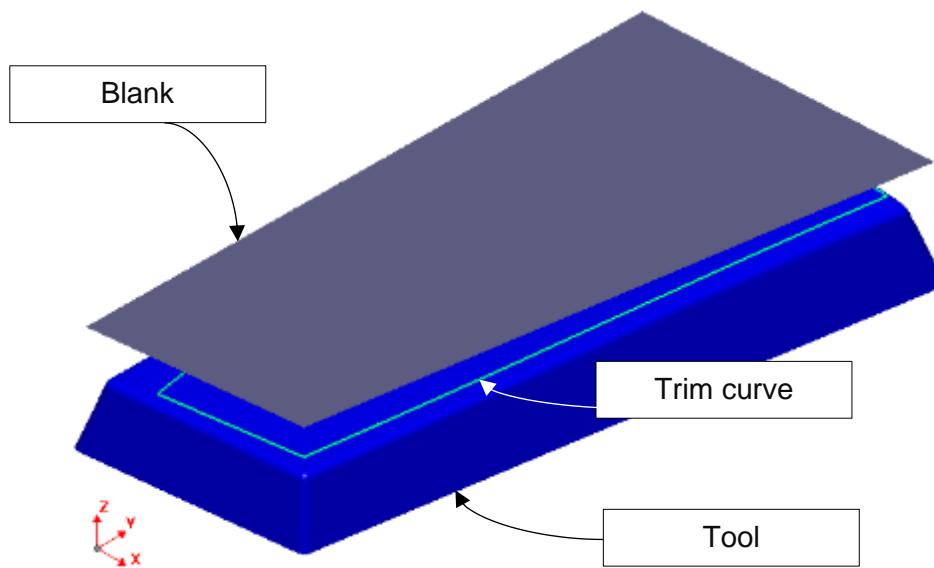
Blank, tool and trim curve assembly set-up PAM-STAMP 2G
